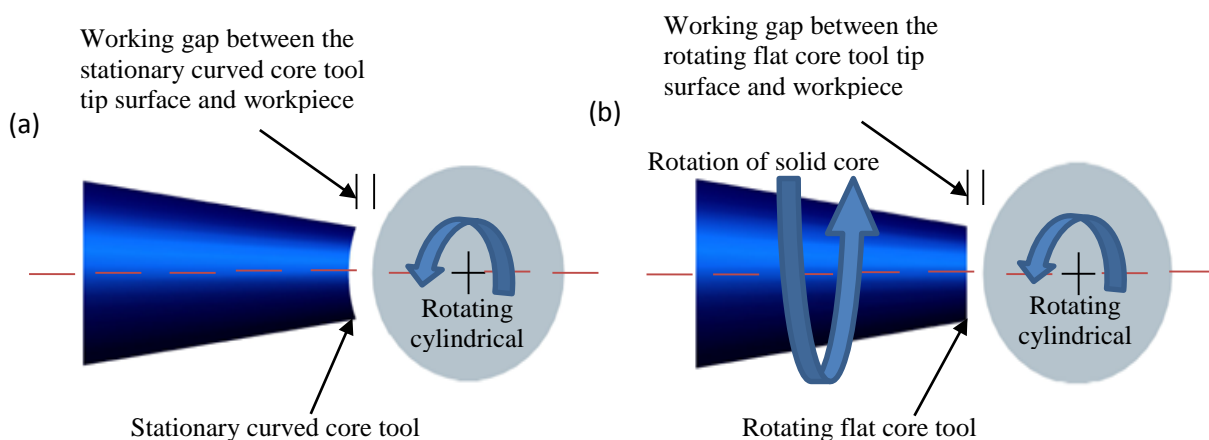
Enlarged view of working gap with (a) stationary curved core tool tip surface, and (b) a rotating flat core tool tip surface
